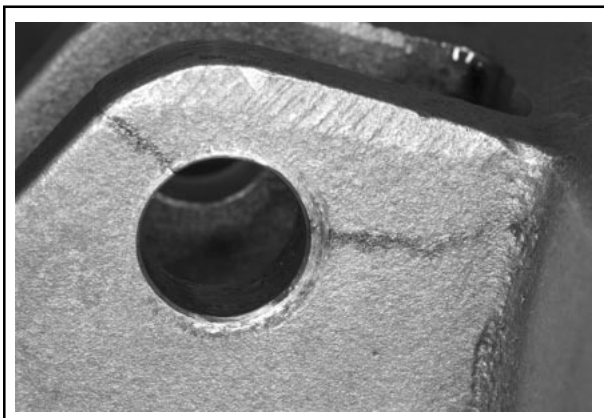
Dye penetrant revealed extensive cracking in exemplar gin lug.
